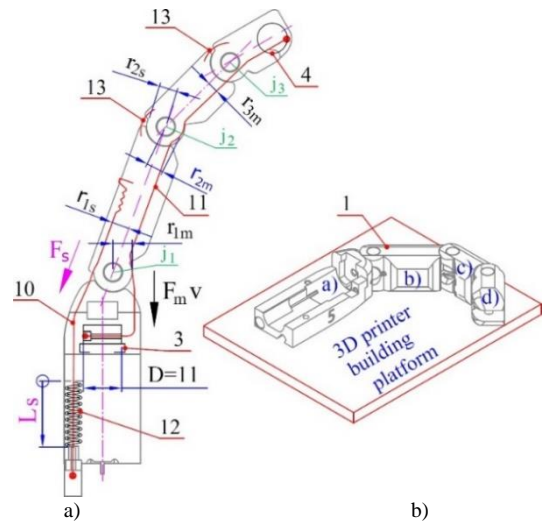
a) Trajectories of the threads in the finger and placement of elastic elements, 1- finger body; 3- driving drum; 4 - tension roller; 10 and 11 – threads; 12 – spring; 13 – rubber bands; b) finger placement on the 3d printer building platform; (from [3])
